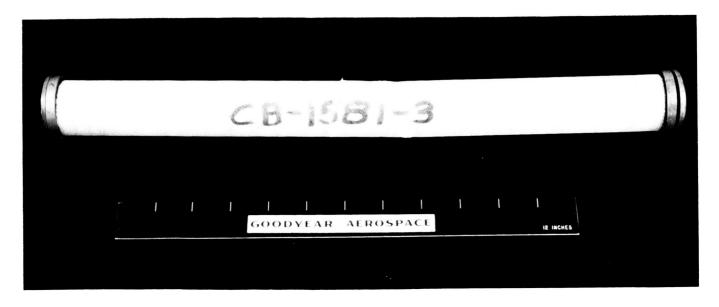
Typical 1581 Cloth Buckled Tube after Test
